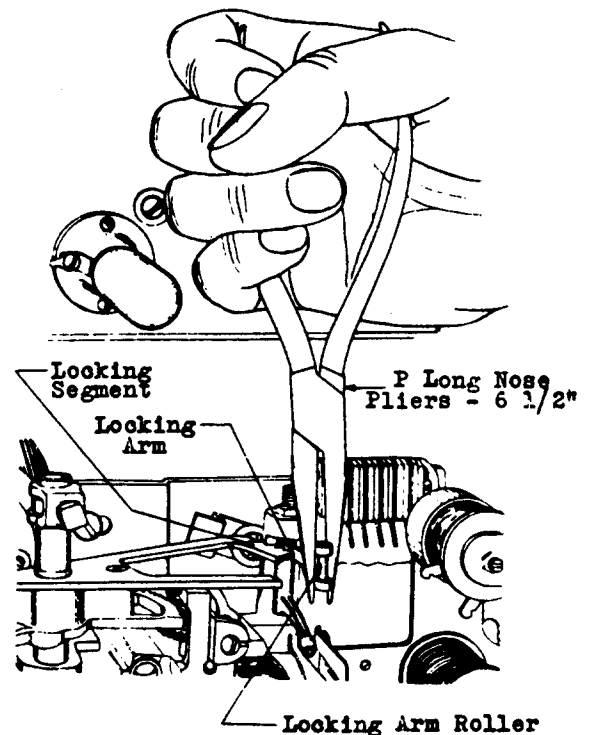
Method of Adjusting Locking Arm Roller Perpendicular to Locking Segment.
